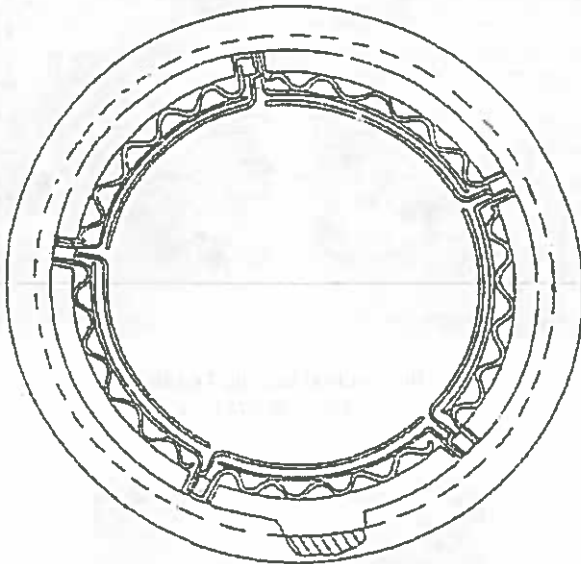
Reversed Multipad Foil Journal Bearing Schematic
